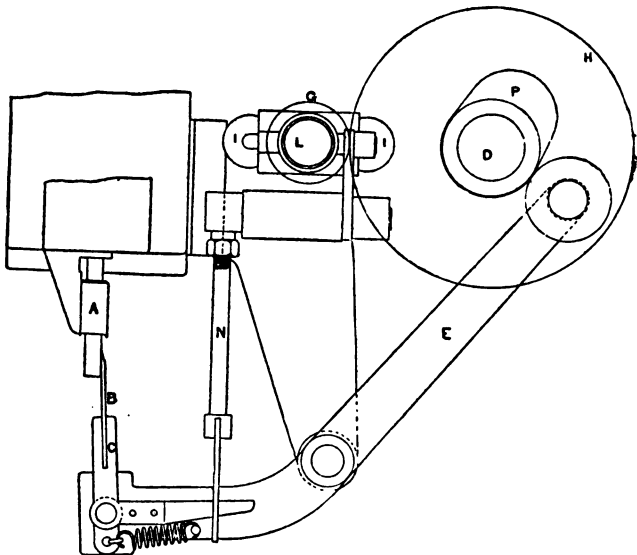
"Stockport" Gas Engine—Governing Arrangement.
